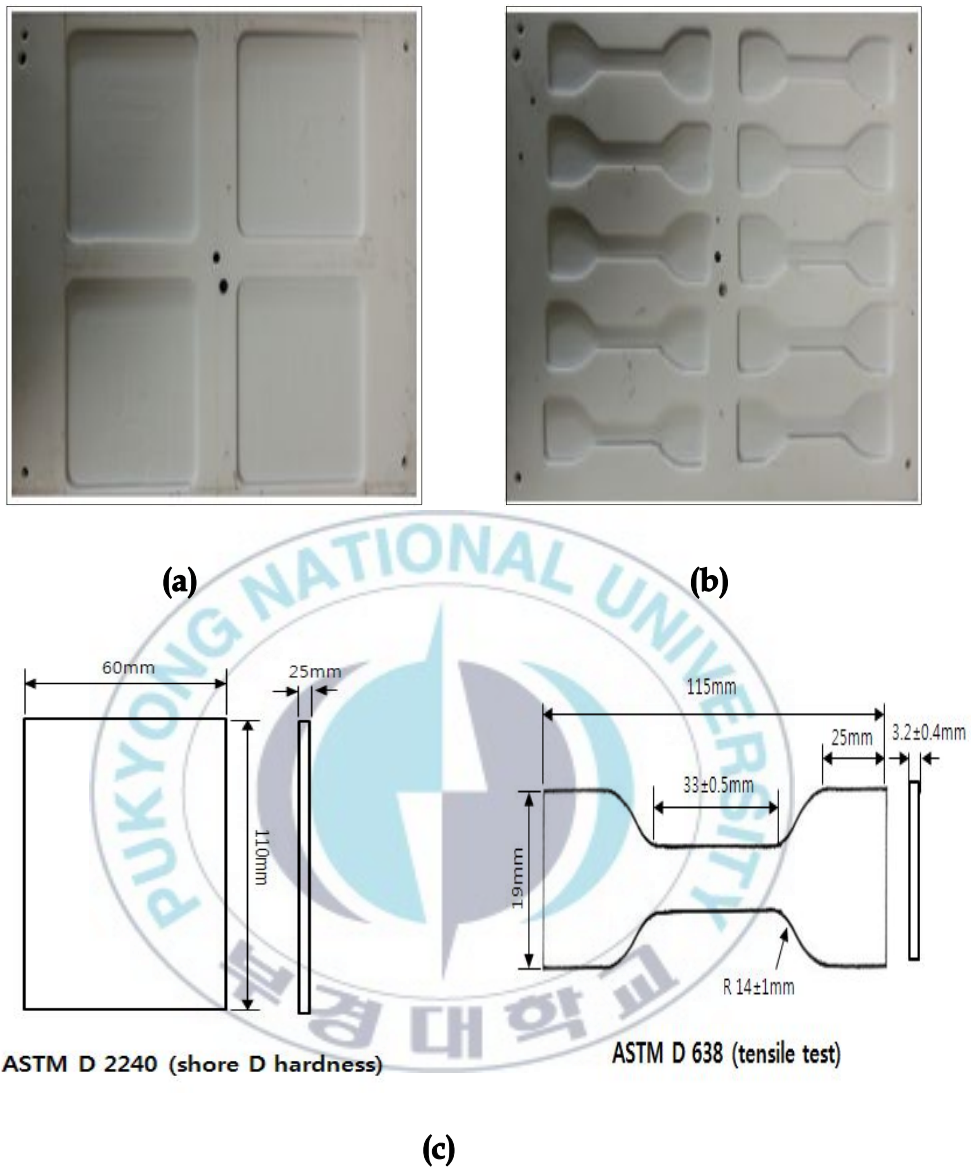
Specimen molders for (a) hardness (b) tensile test and (c) dimension of specimen
